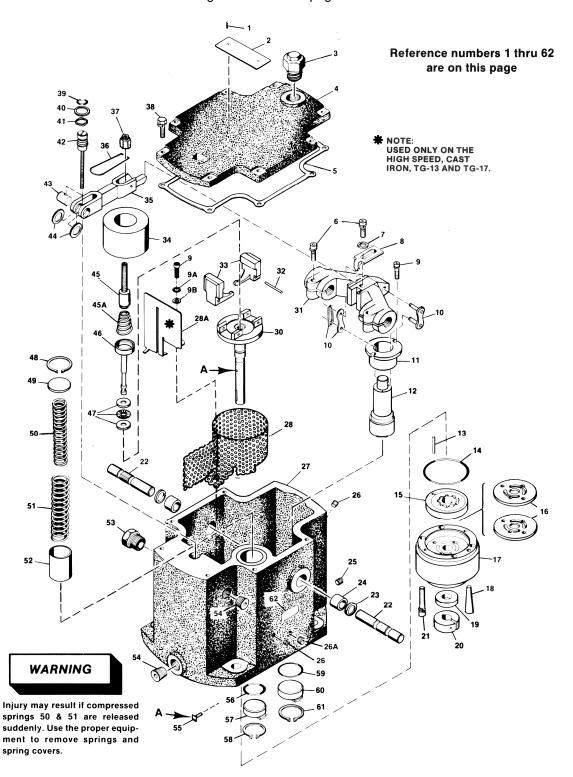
Parts for the TG-13 and -17 Governor, Cast-Iron Case, Screw Speed Setting
